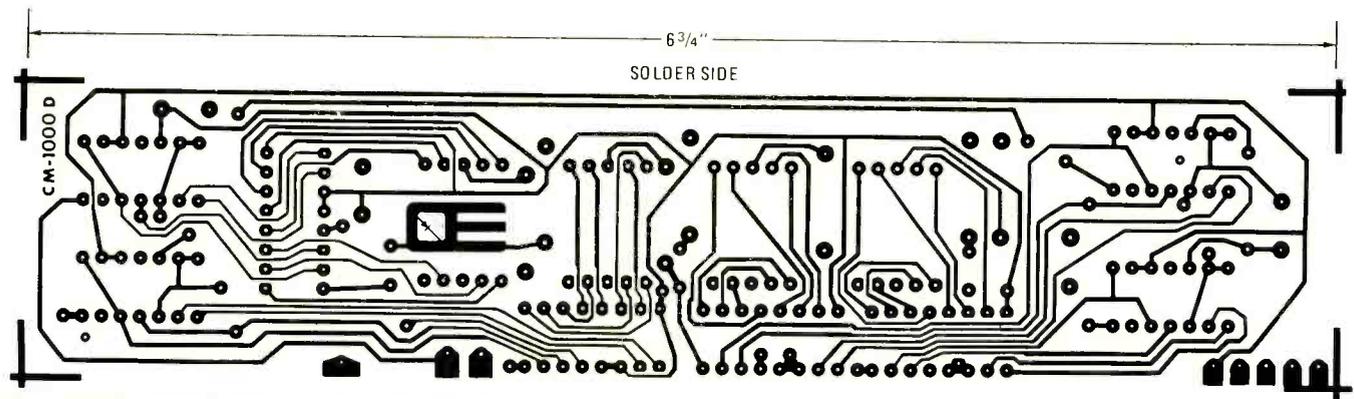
BACK SIDE OF DISPLAY PANEL is etched with this foil pattern.
